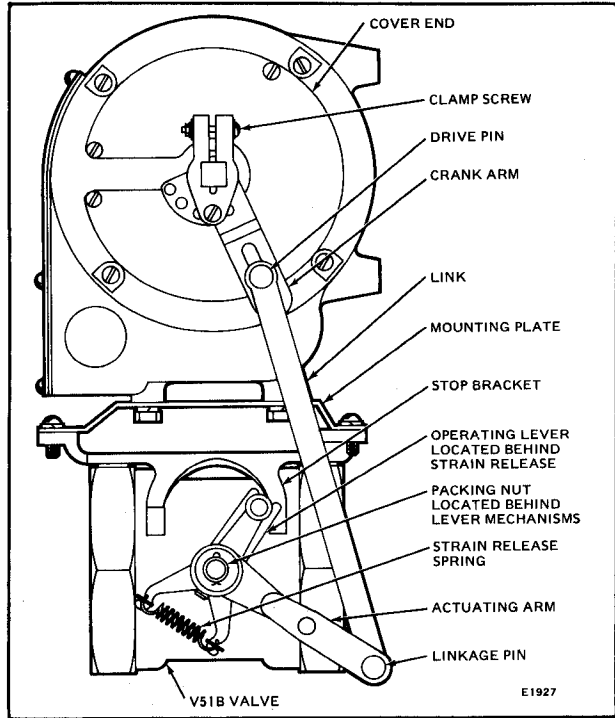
Q100C LINKAGE ASSEMBLY (V51B).
